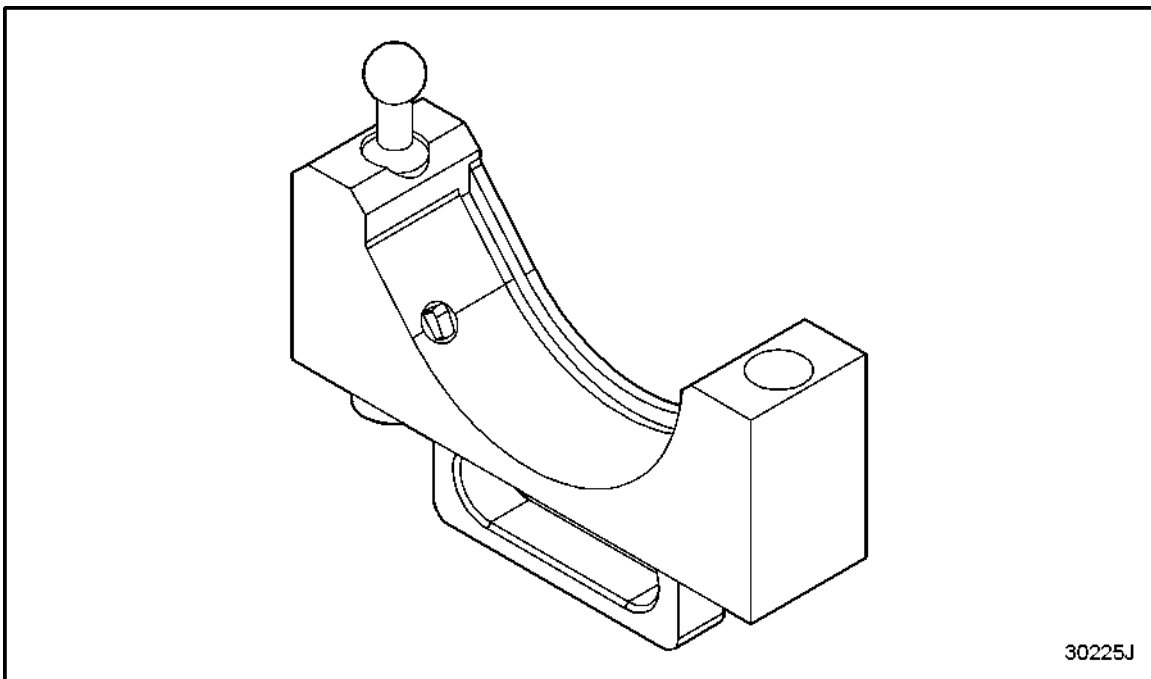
Rod Bearing Adjusting Tool,J 42726
